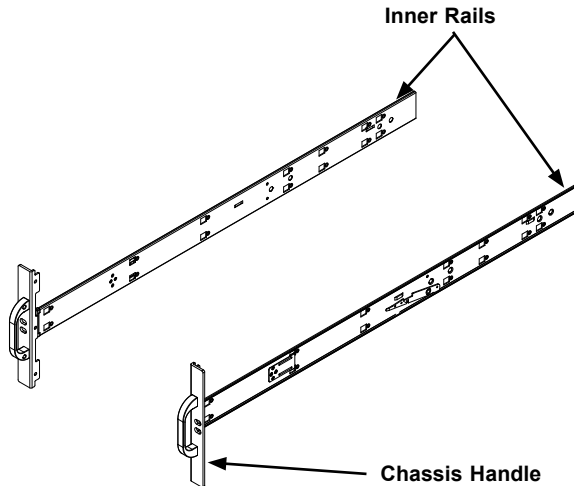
Identifying the Inner Rails and Chassis Handles
